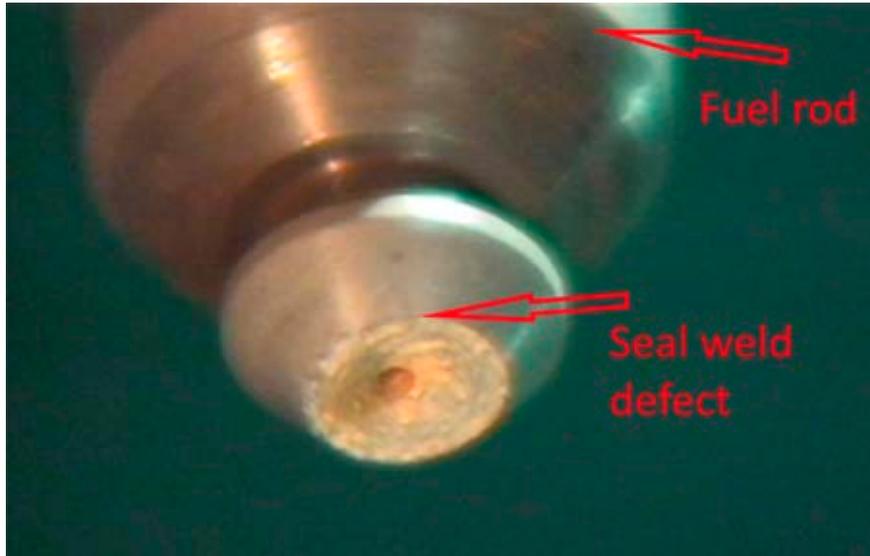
Seal weld defect on a FR in an French reactor. Figure courtesy of AREVA NP.
